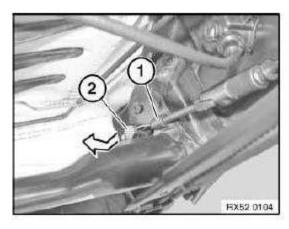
Removing Sleeve Courtesy of BMW OF NORTH AMERICA, INC.
